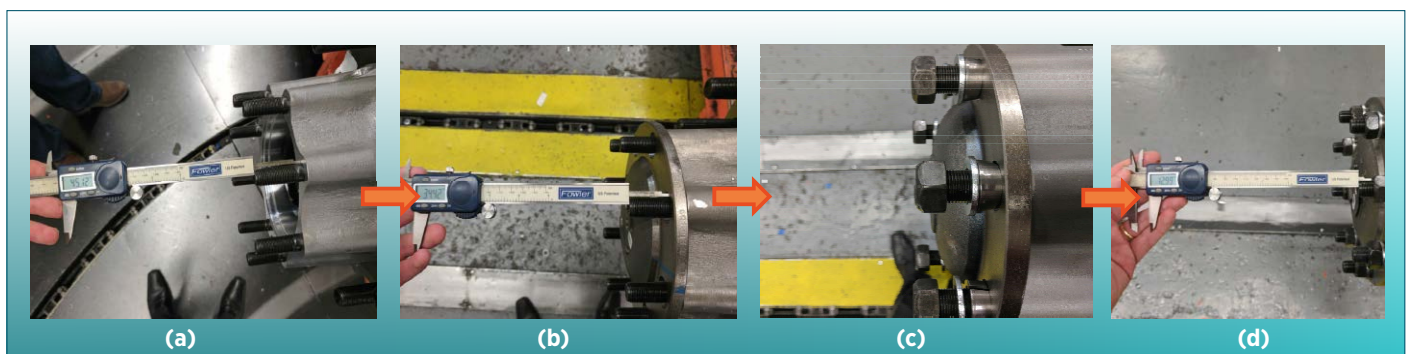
Installation process of the problematic 3-piece system. (a) Hub as received at the assembly line, (b) installation of axle shaft, (c) installation of the 3-piece fastening system - coned bushing, flat washer and lock nut, (d) tightening of nut
